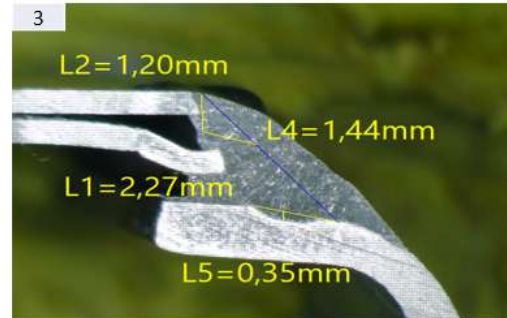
Flare-Bevel-Groove Weld, Convex
